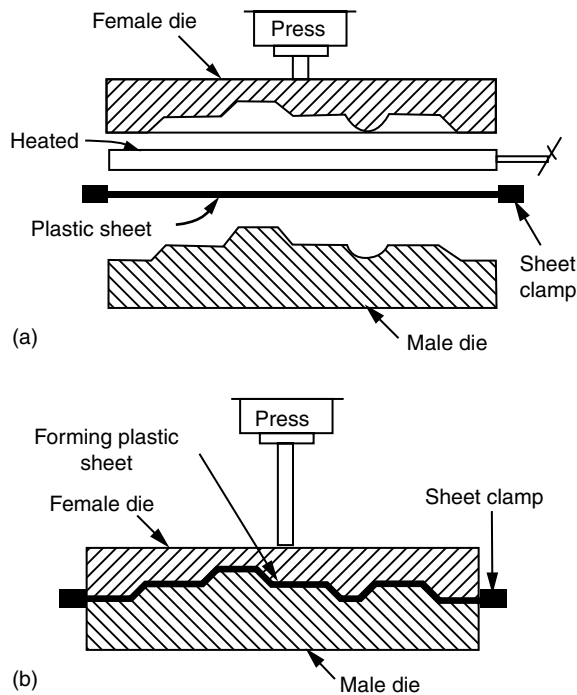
Matched mold forming: (a) heating; (b) forming.
